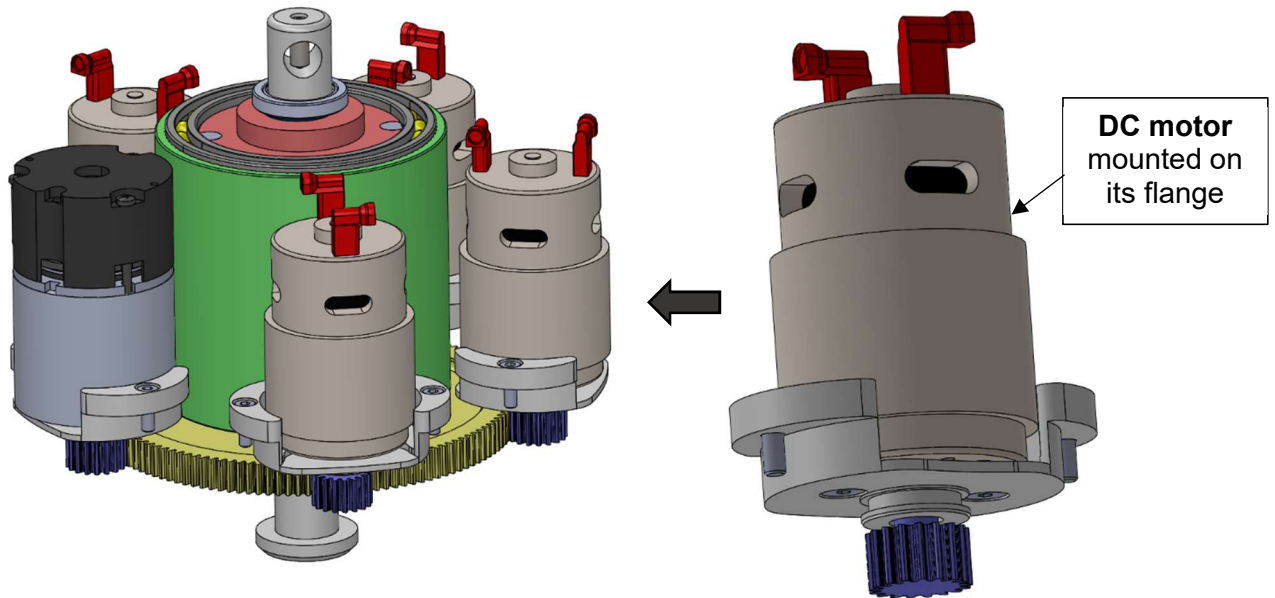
Assembly of the motors and the negative brake on the left. DC motor with its flange on the right
